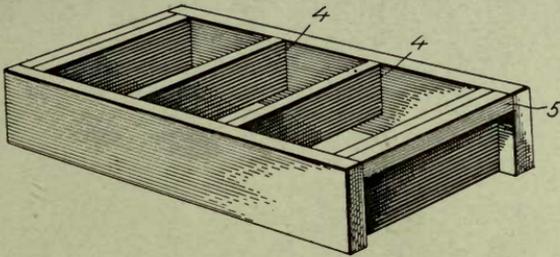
Drawing showing standard dimensions of a wrapping board.
